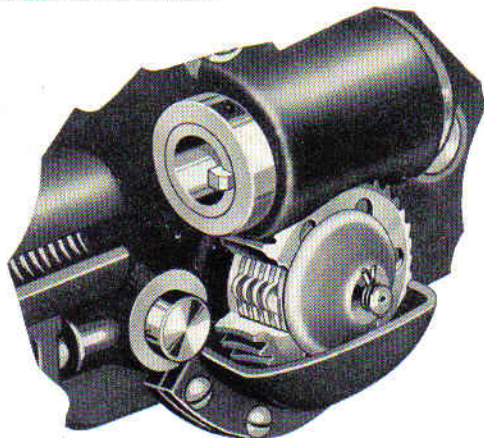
Close-up showing construction of the multiple disc clutch and worm drive for automatic feeds. A part of the worm gear has been cut away to show the discs.
